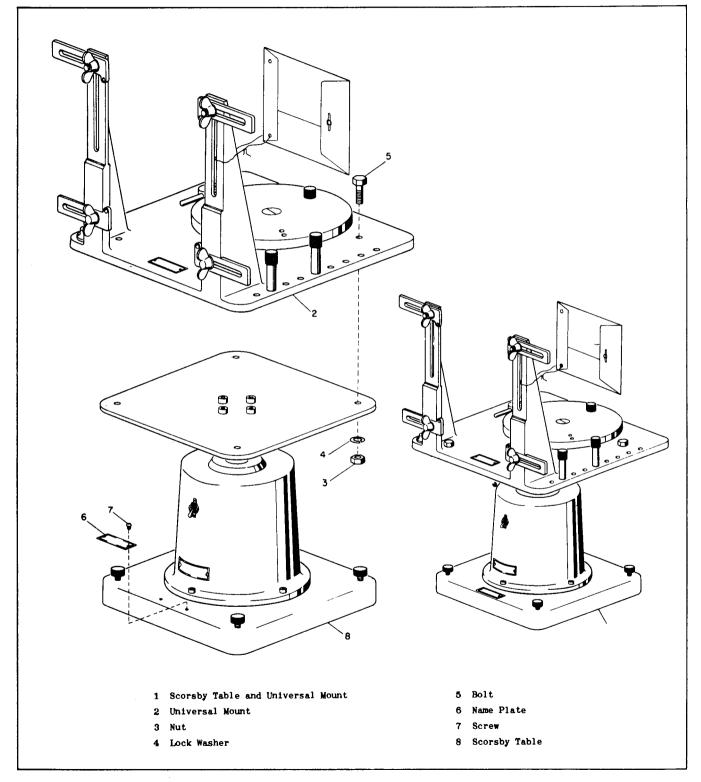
Exploded View - Table Scorsby with Universal Mount
